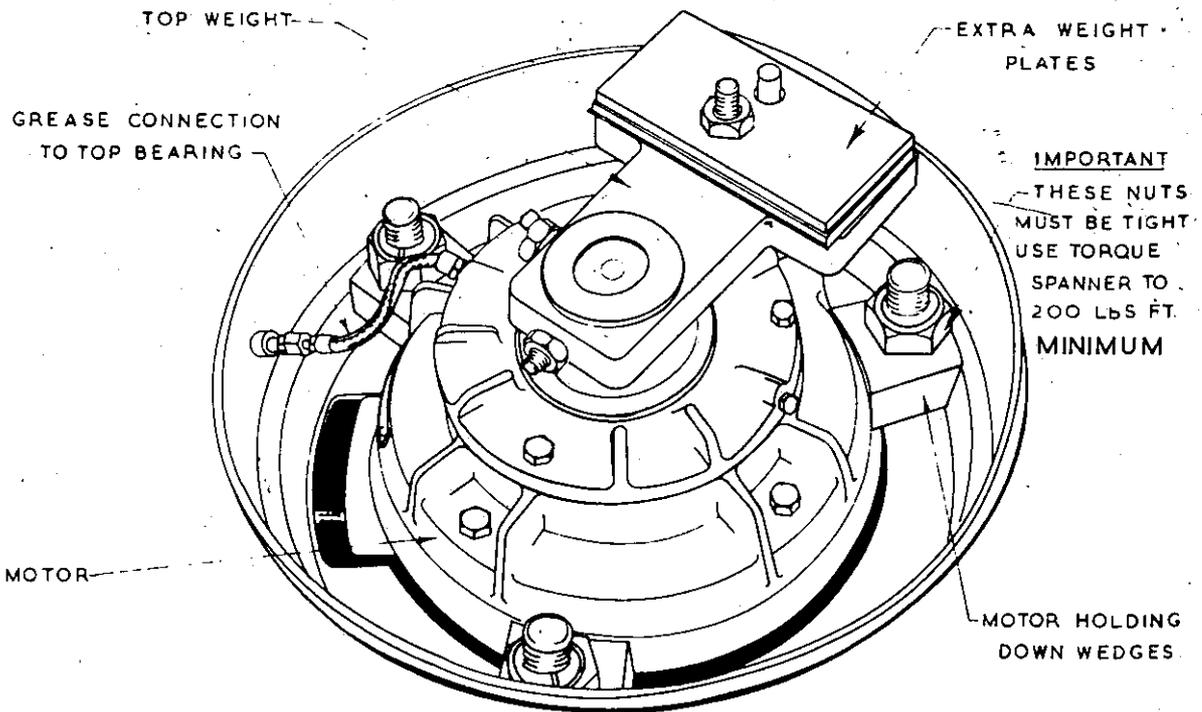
VIEW SHOWING TOP MOTOR WEIGHT
